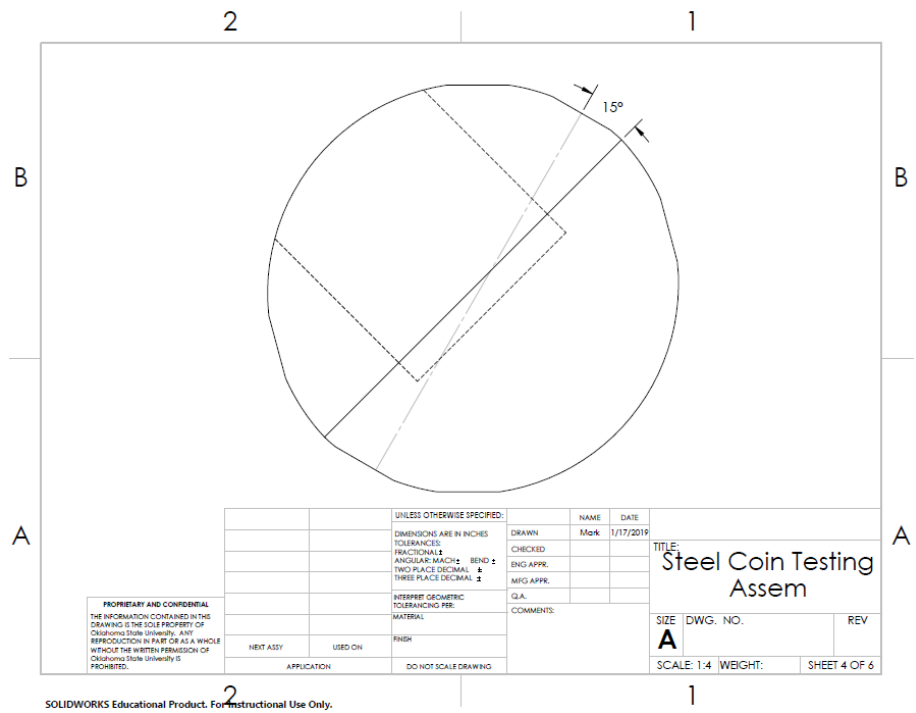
Shear bond test sample holder noting the 75° platen.
